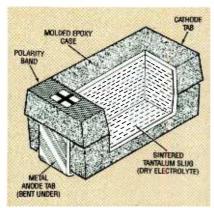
CUTAWAY VIEW OF A SOLID tantalum capacitor chip for surface mounting applications.
